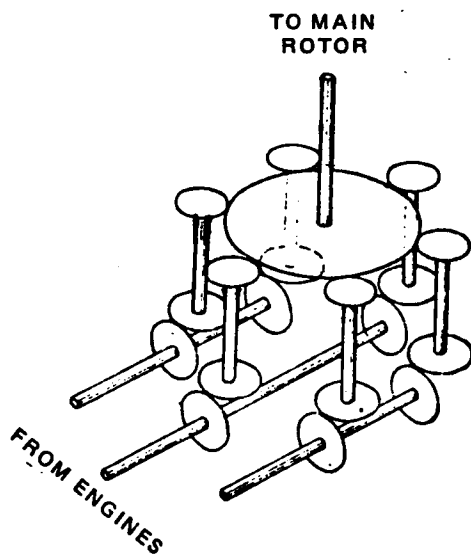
Possible scheme of the first step of the main gearbox of a three-engine, single-rotor helicopter
